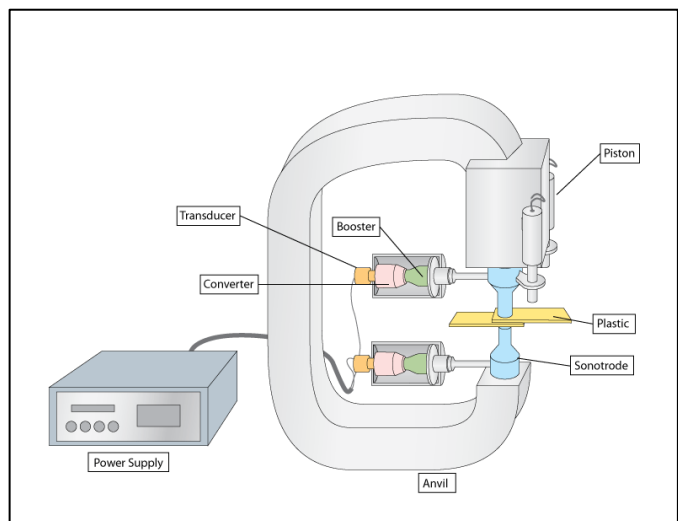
Schematic of Sonobond Ultrasonic Welder at SDSMT (Author's Work)
